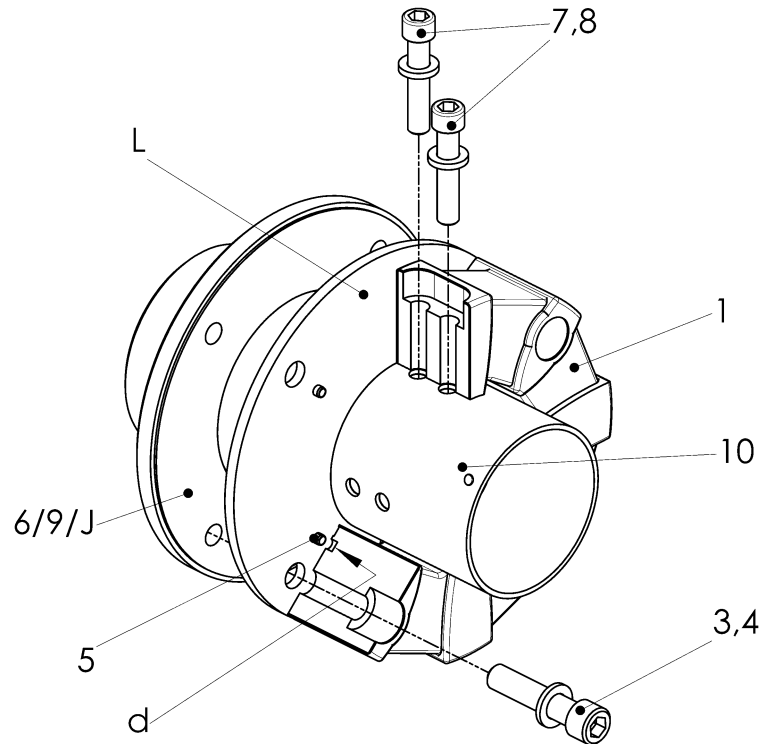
Mounting the tube, the centring flanges and the rubber elements
